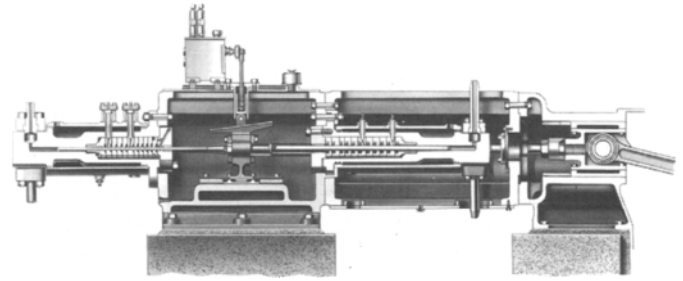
P. Fifth- and sixth-stage cylinder assembly of 15,000 psi gas compressor. "Bathtub" design of intermediate cross-head permits use of short opposed plungers ensuring operating alignment. A design for pressures as high as 35,000 psi. (Used by permission: Dresser-Rand Company.)
